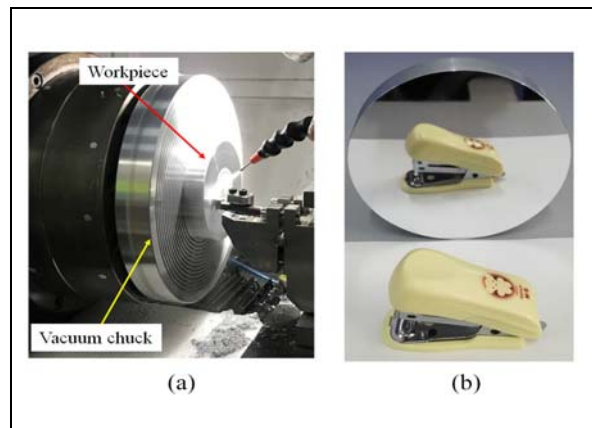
Tested result of the machined surface ($n=1200\text{r/min}$):(a) Turning process fixed on a vacuum chuck; (b) Machined workpiece.
